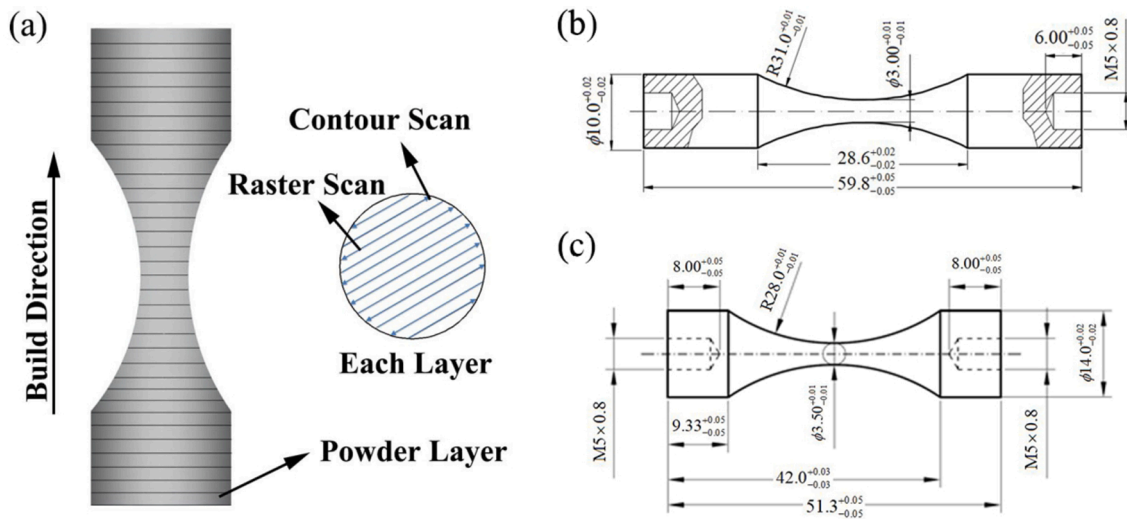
(a) Build direction and printing strategy of the LPBF process, shape and dimensions (mm) of (b) as-built and (c) surface-polished fatigue test specimens.
